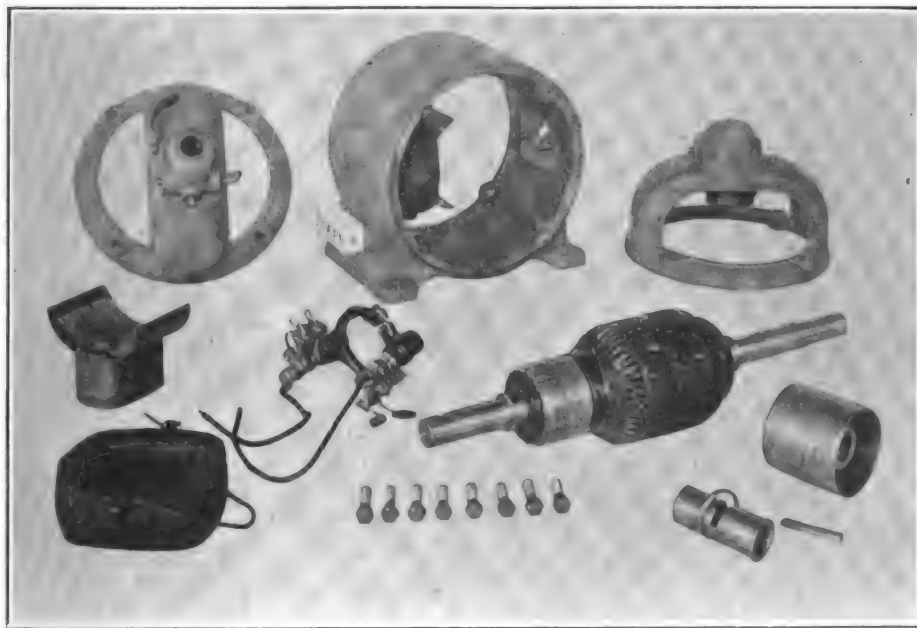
GENERAL ELECTRIC "CQ" MOTOR DISASSEMBLED.
